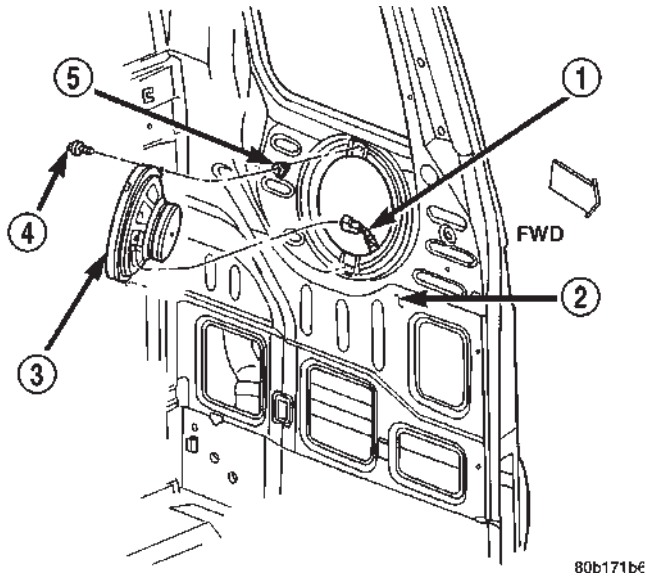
Rear Speaker Remove/Install - Standard Cab
